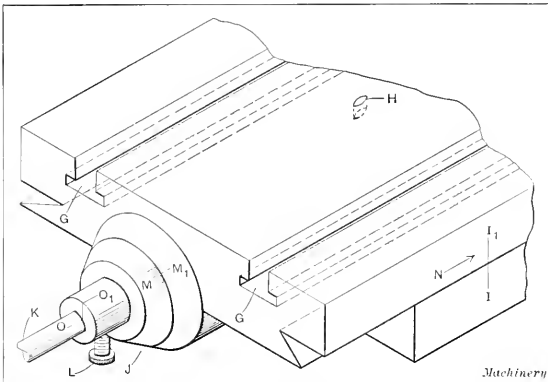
Locating Longitudinal Position of the Milling Machine Table
